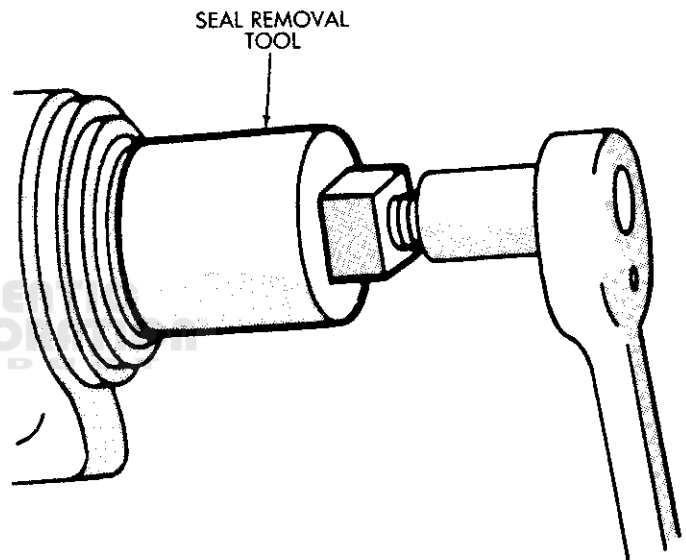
Drive Pinion Gear Shaft Seal Removal
